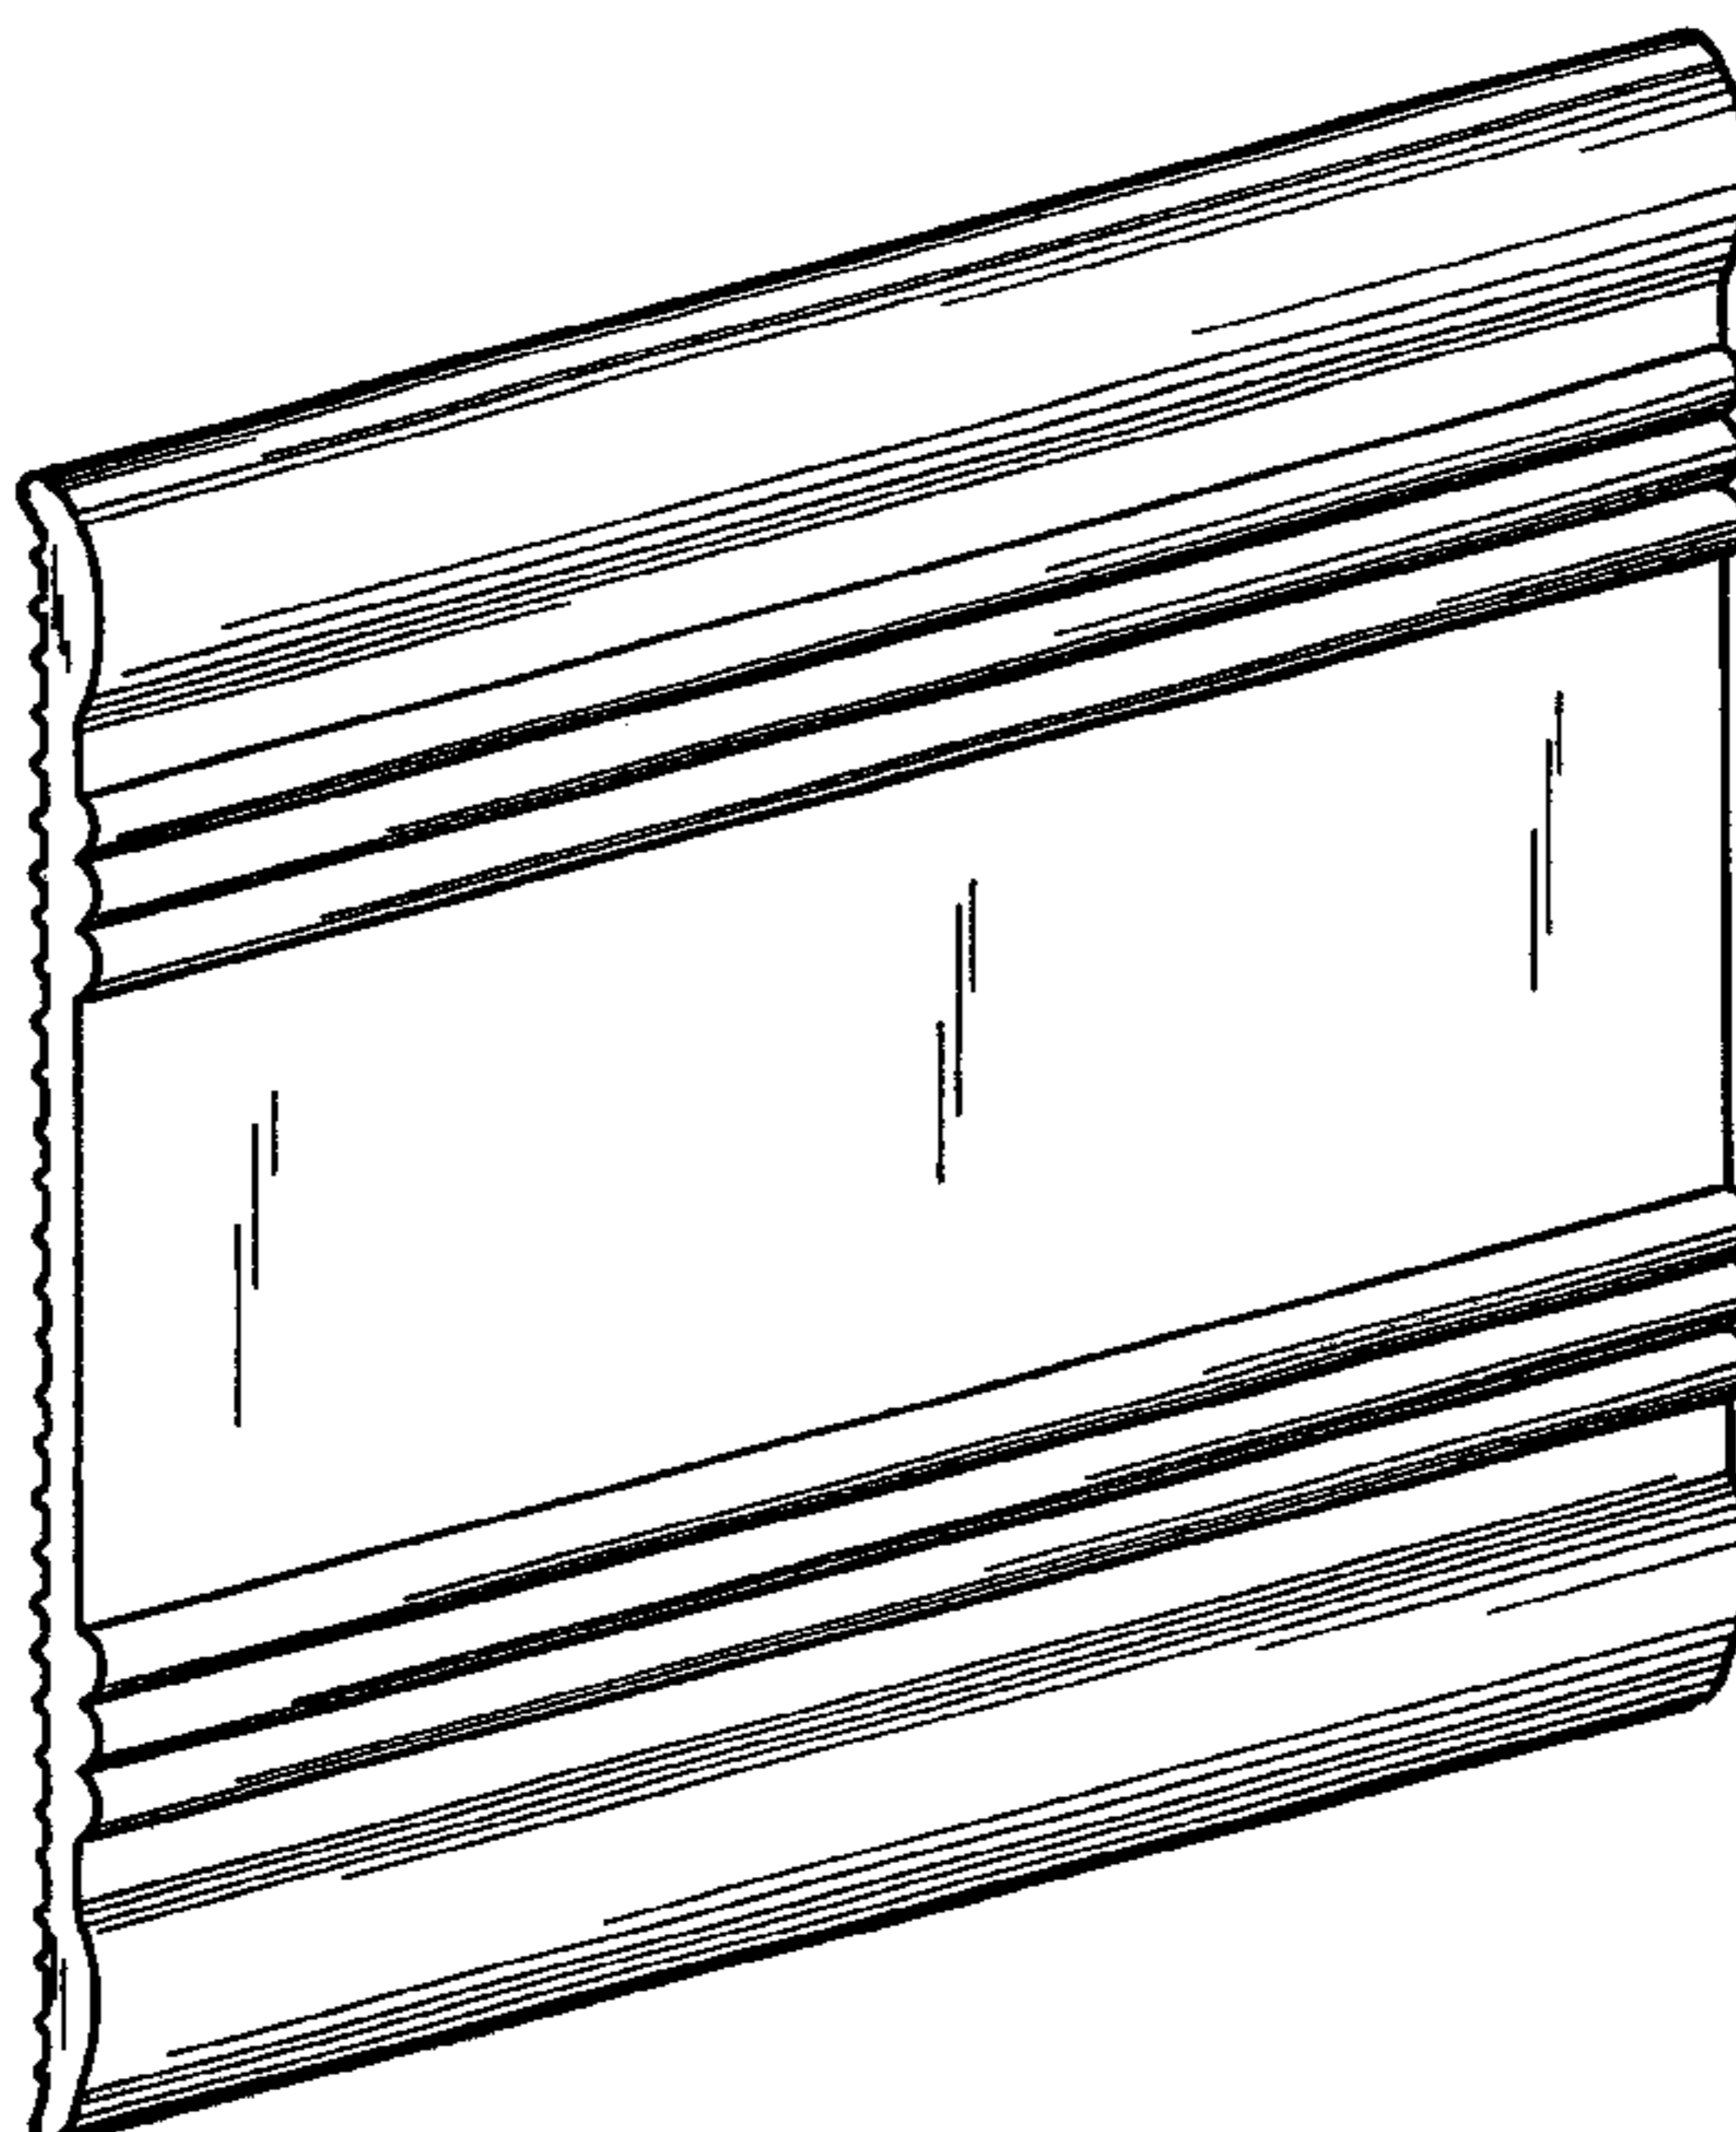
is a front view of the second embodiment of the protective wall base extrusion.
